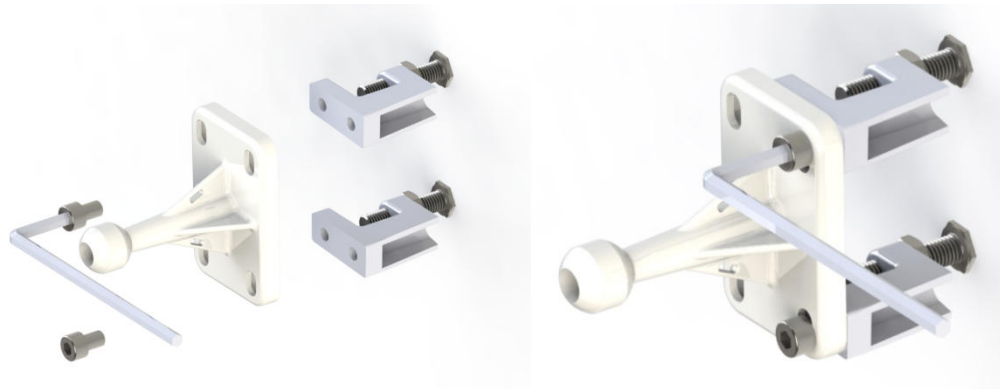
Screwing the I-Beam clamp onto the mounting bracket
